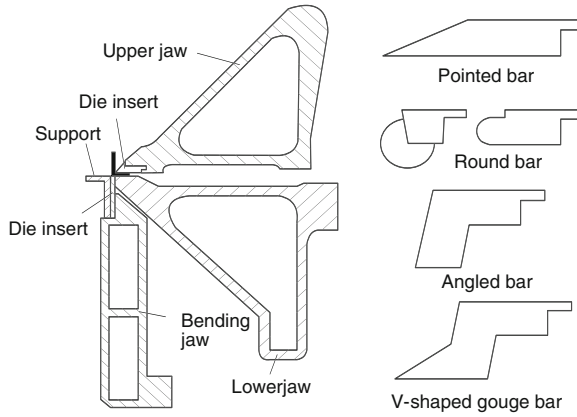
Cross-section of a folding machine and the main bending rail profiles used
